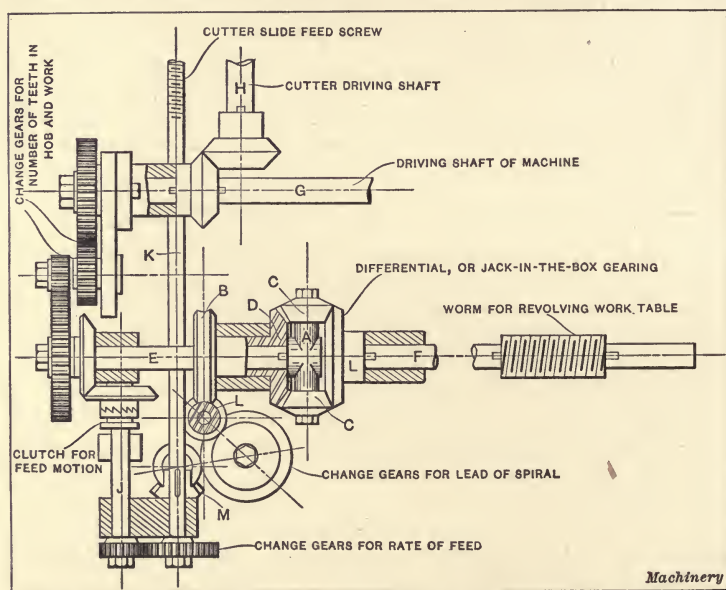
Typical Arrangement of Gearing for Spiral Gear Hobbing Machine
